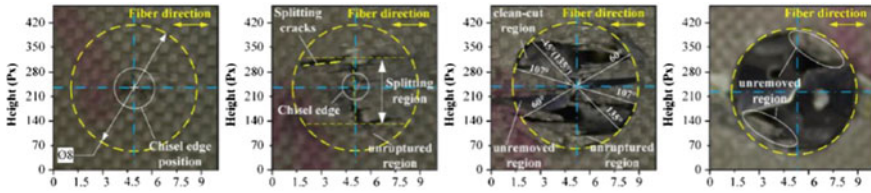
The interaction between drill and workpiece during drilling out (diameter: 8 mm, cutting parameters: $S = 3000$ rpm, $f = 150$ mm/min) [17]
